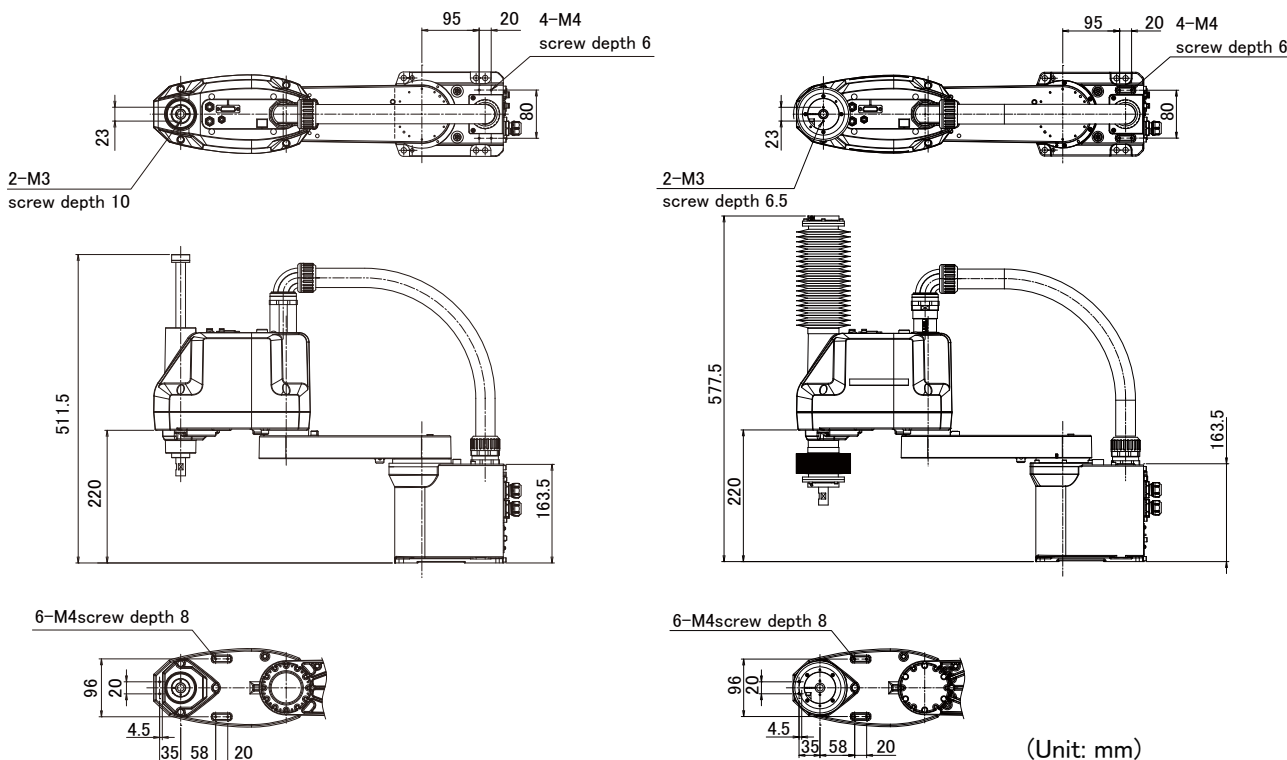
Location of screw holes for fixing wiring/piping (RH-3CH-Sxx)
